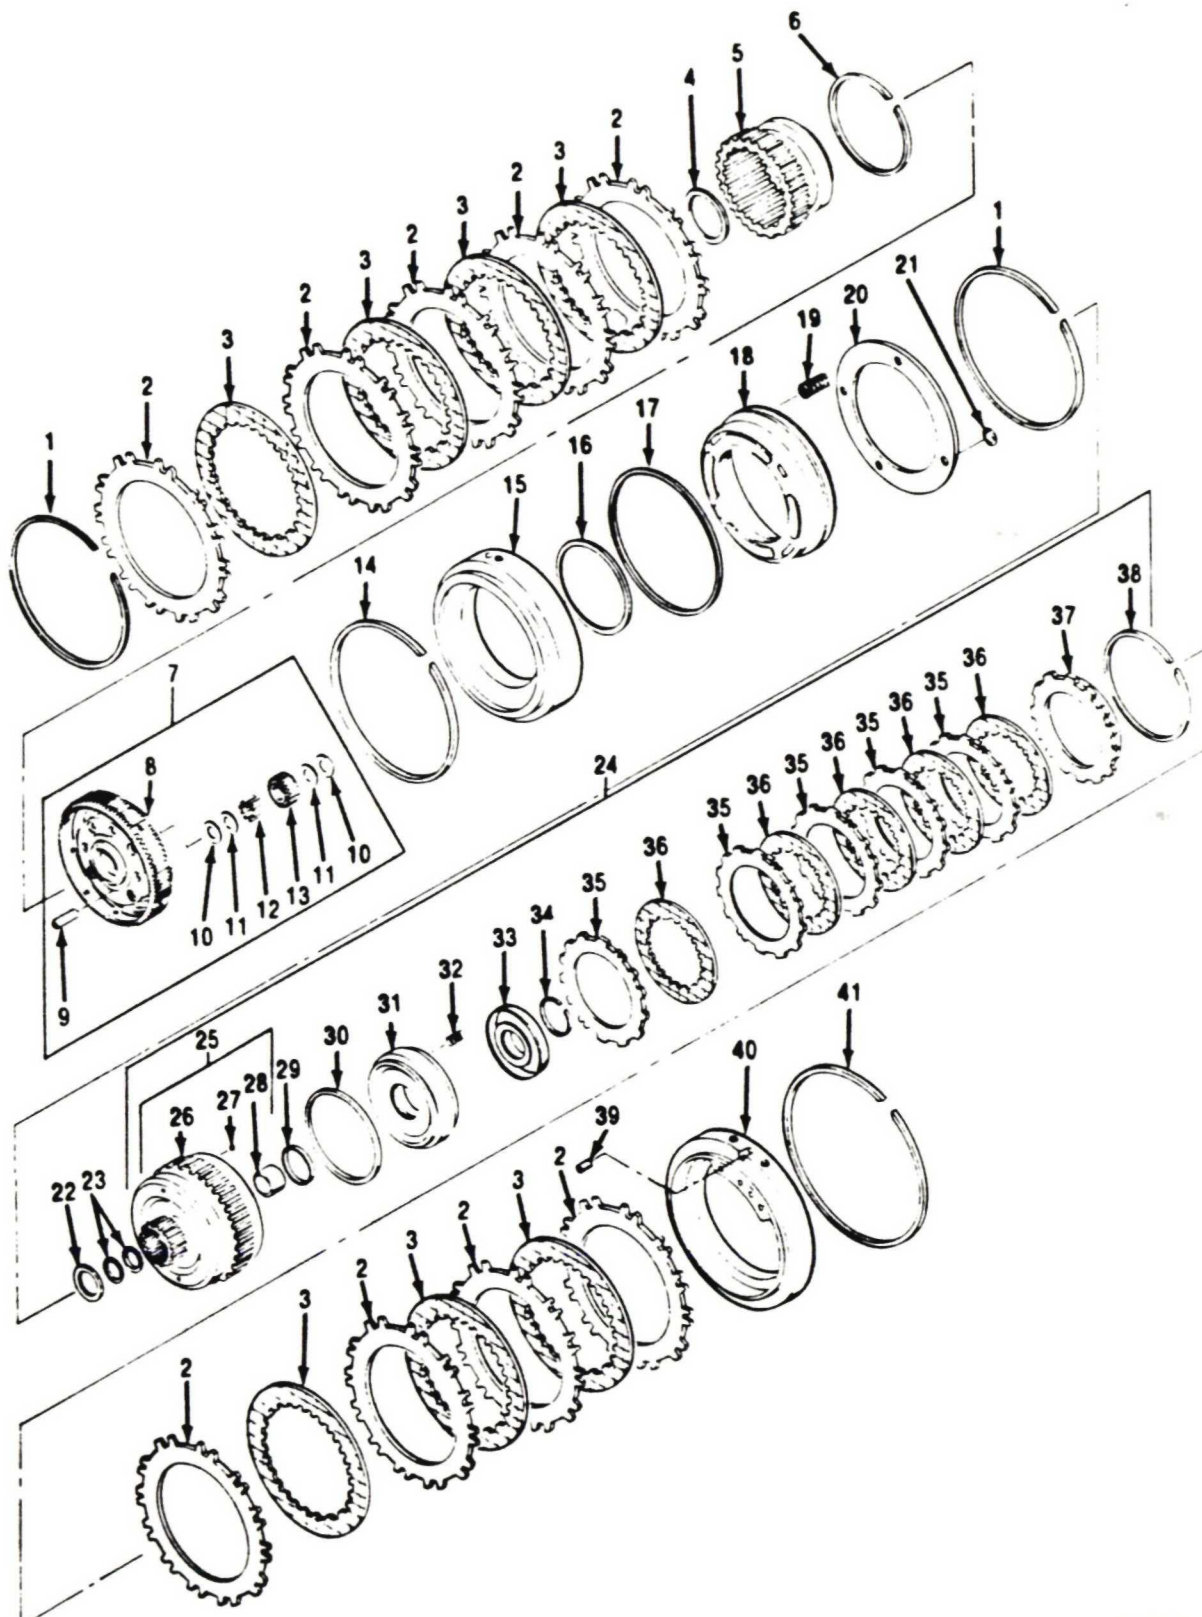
2nd and 3rd Clutch, Front Carrier, 4th and Reverse Clutch
